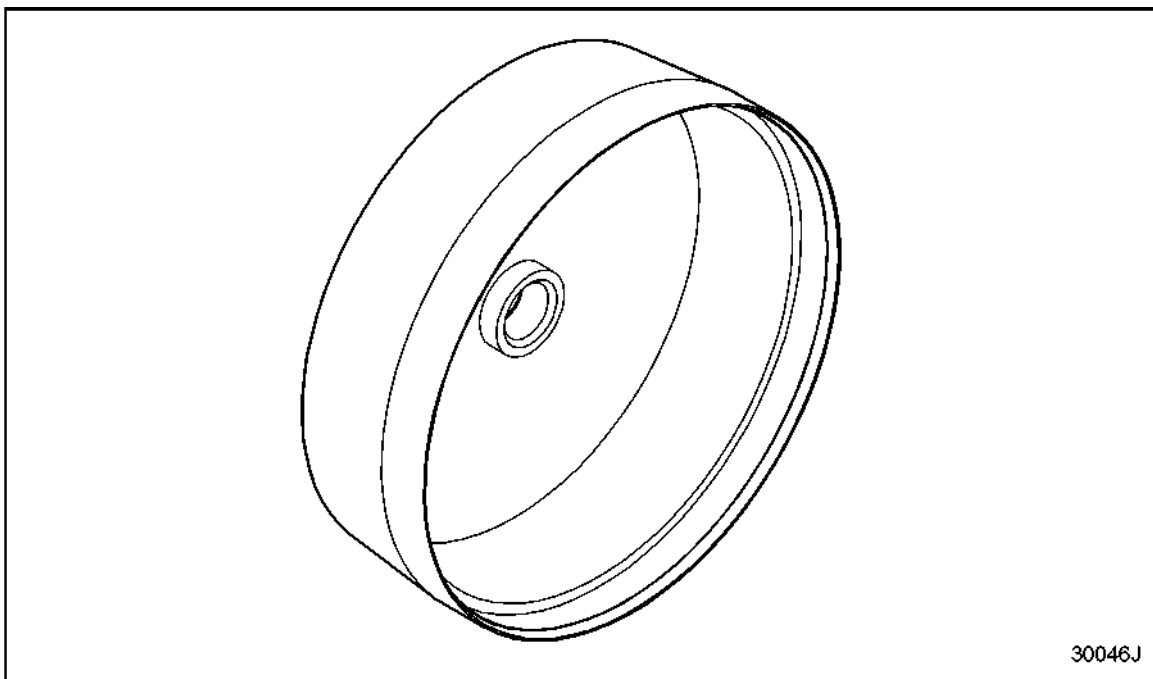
Rear Seal Expander (Oversize Seal), J 22766
